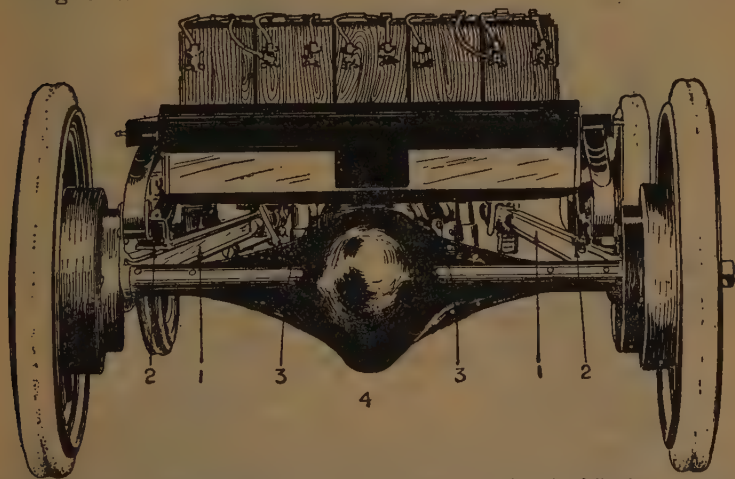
,079.—Rear view of Wood's chassis with battery showing the following features of construction: 1, radius rods extending from rear axle to sub-chassis frame; 2, rear springs rest on radius rods, instead of on rear axle; 3, motor, showing ball and socket spring suspension; 4, worm drive, showing location of worm below rear axle.
